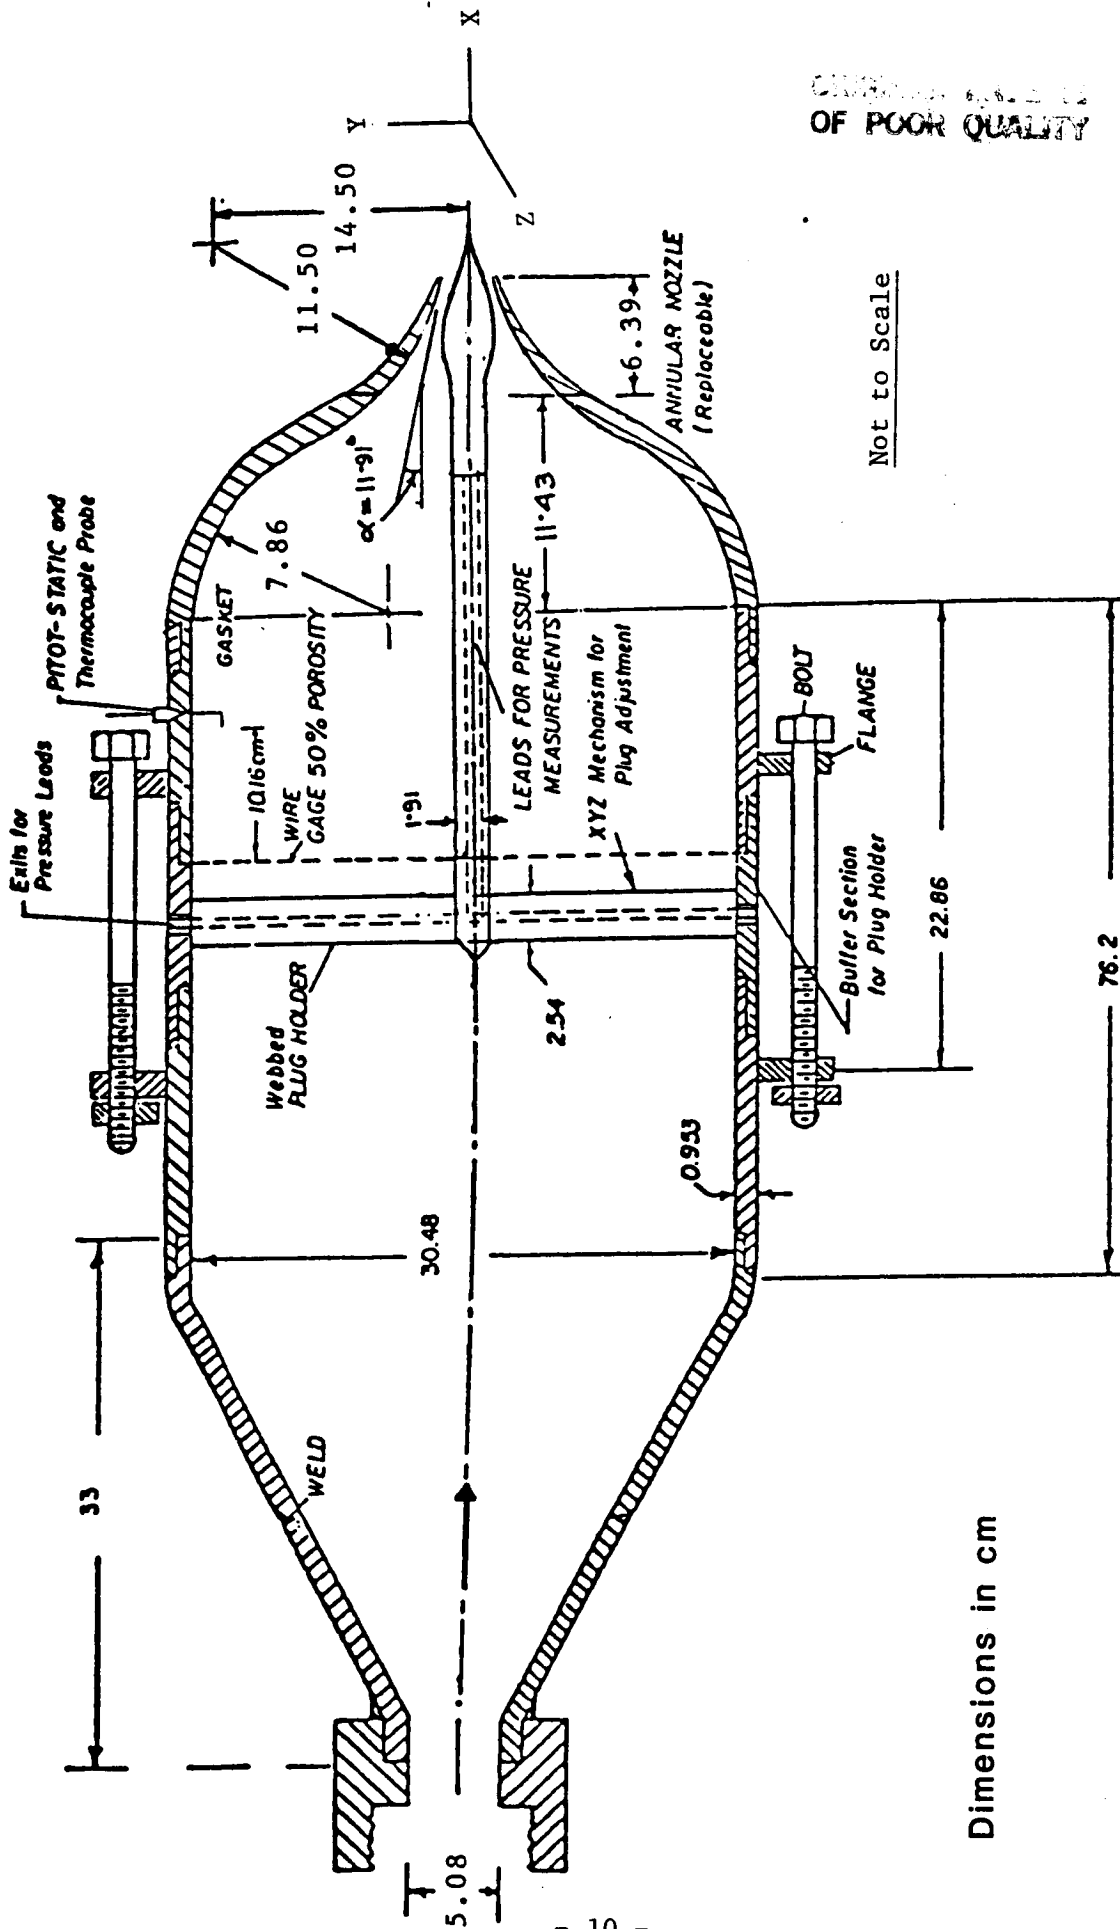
Plenum-Chamber and Plug-Mounting Assembly for the Plug-Nozzle.
